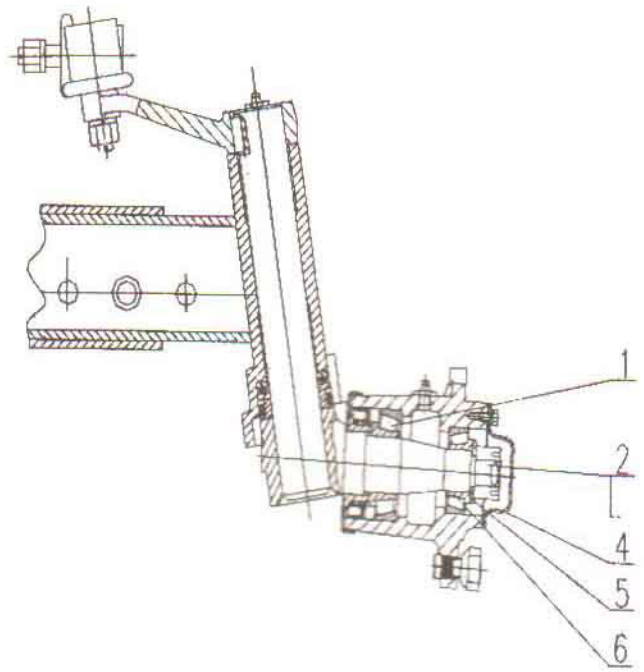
Adjust axial clearance of front wheel bearing
